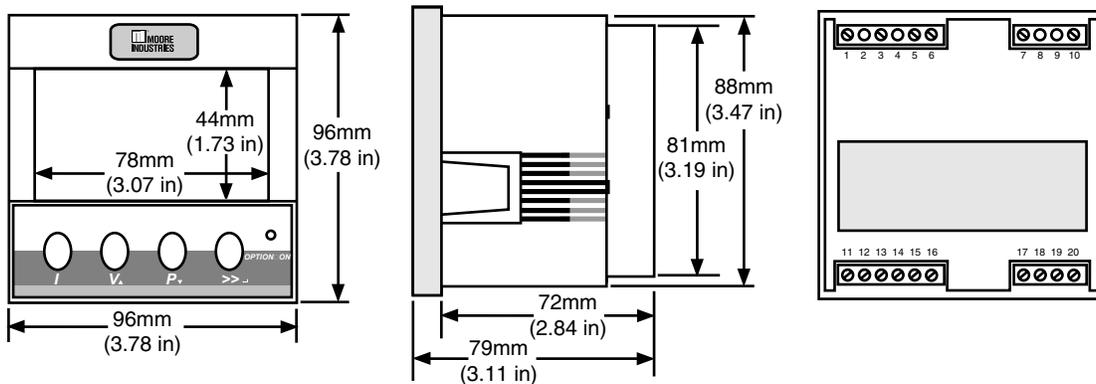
PPM Dimensions— Panel should be 1mm (.04 in) to 4mm (.16 in) thick with a square cutout of 92mm (3.62 in)
